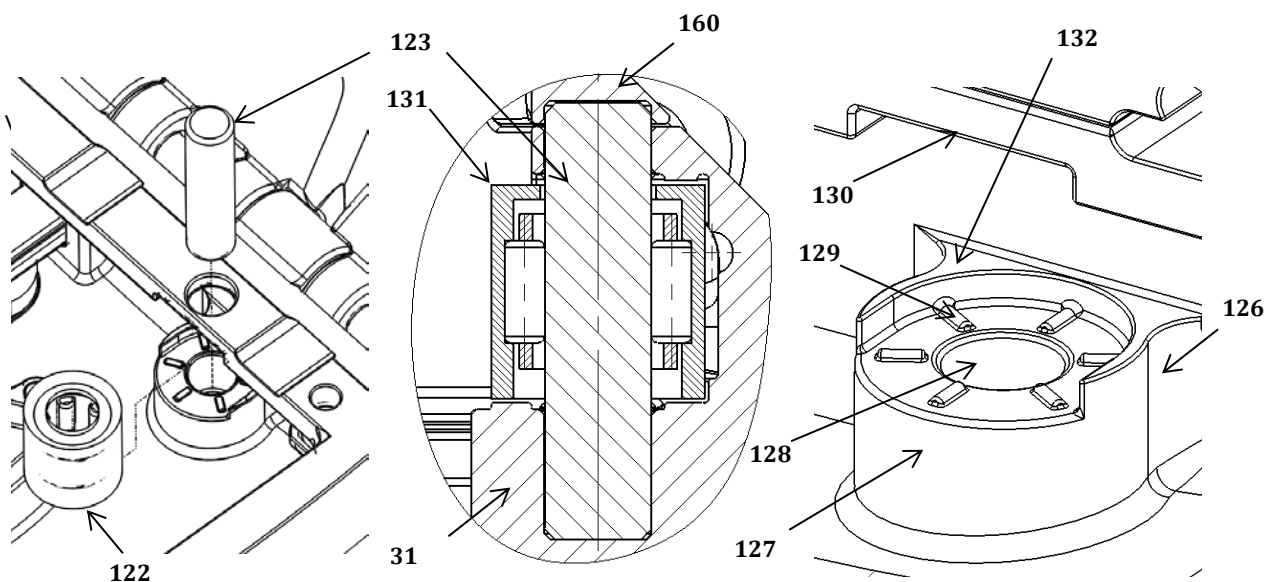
Perspective and section view of the routing bearing assembly as well as a perspective view of the routing bearing support.
